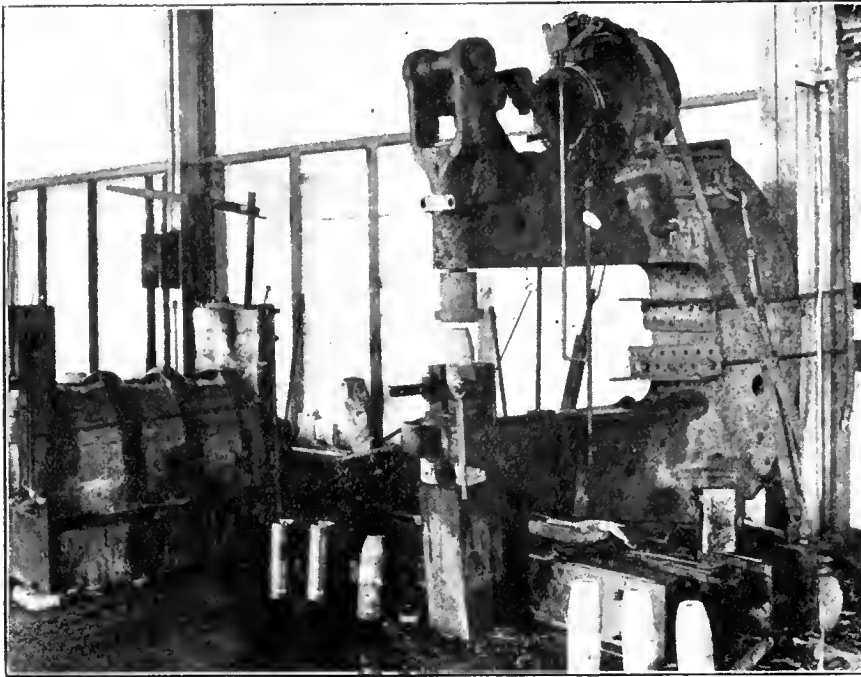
PNEUMATIC RIVETER USED FOR NOSING 4.5 INCH H. E. SHELLS.
